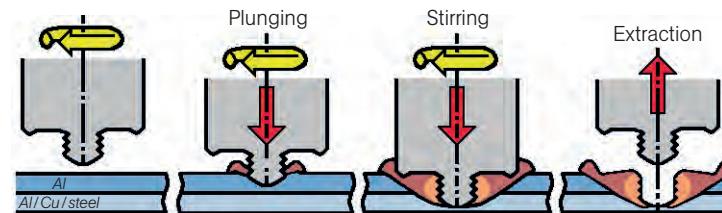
The FSSW welding cycle without refilling.
